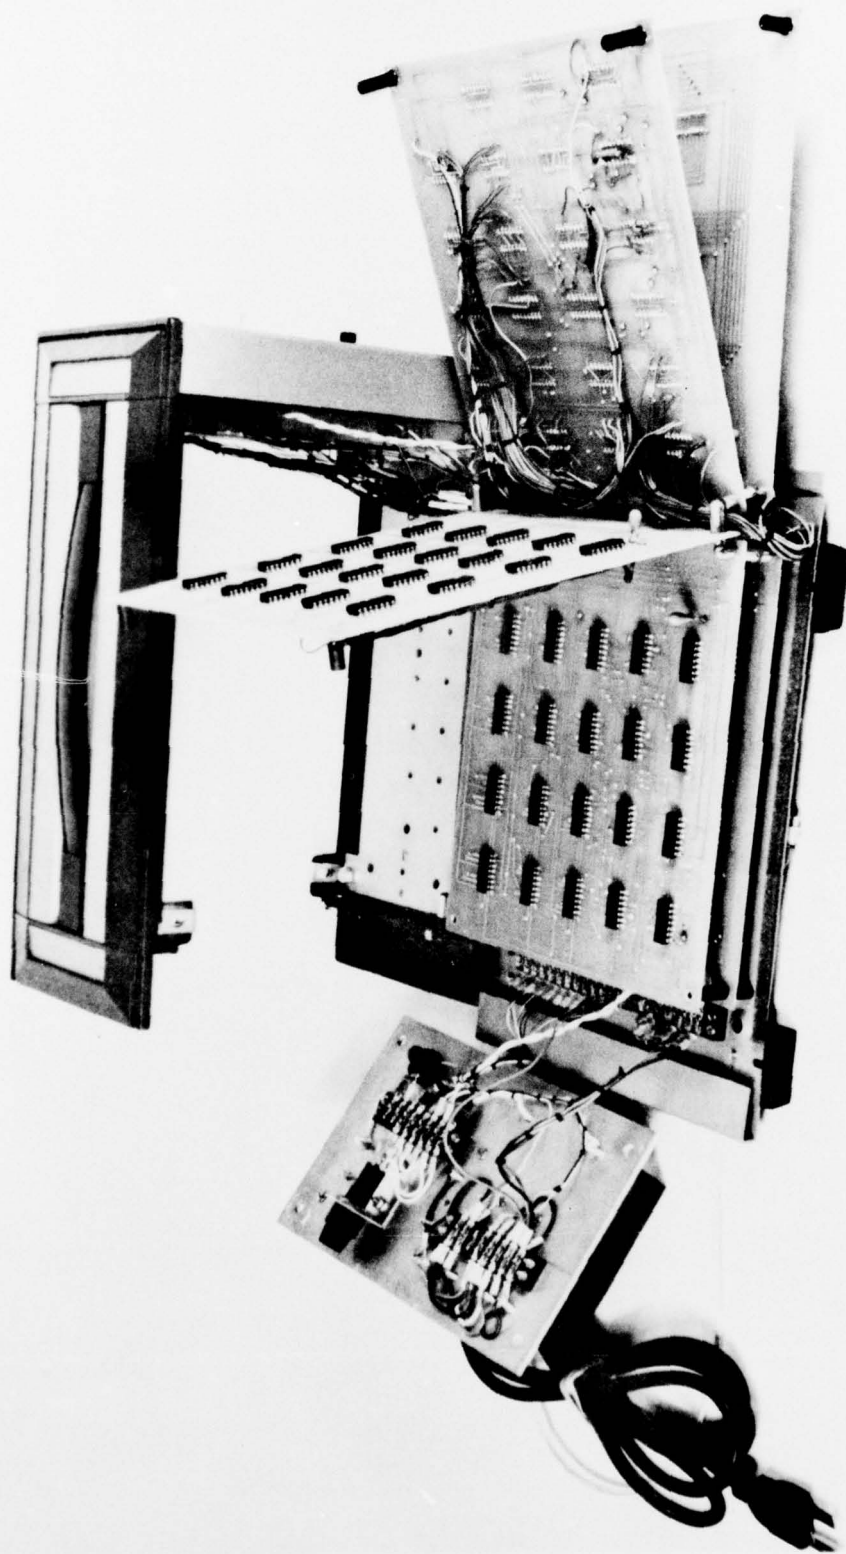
SSRD ASSEMBLY, VIEW 3
